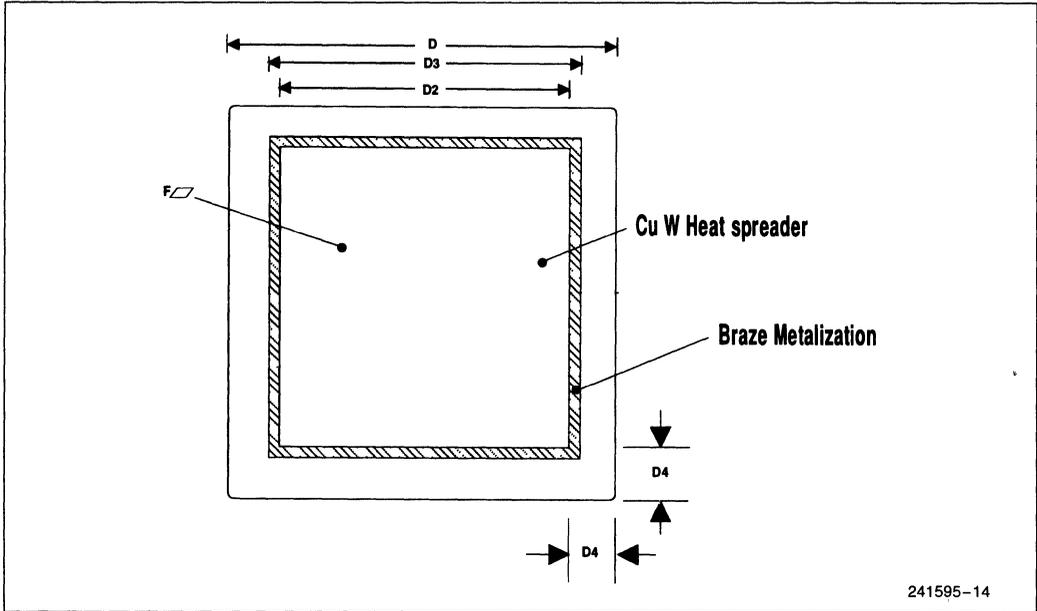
Pentium® Processor (510\60, 567\66) Package Dimensions
